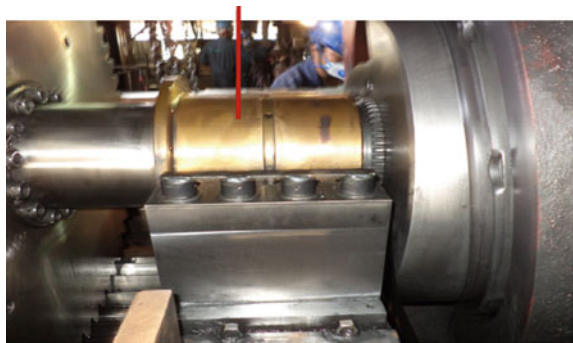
Damaged intermediate gear and roller bearing
